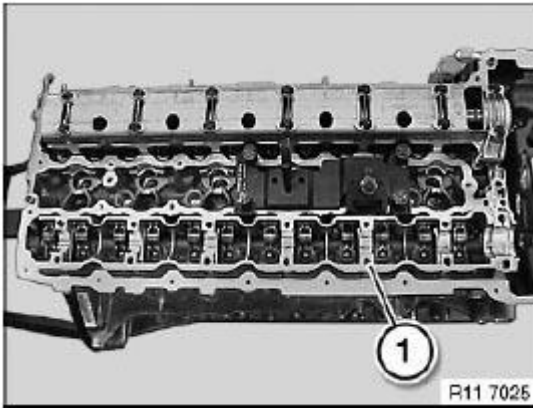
Lay Lower Bearing Strip (1) On Cylinder Head
